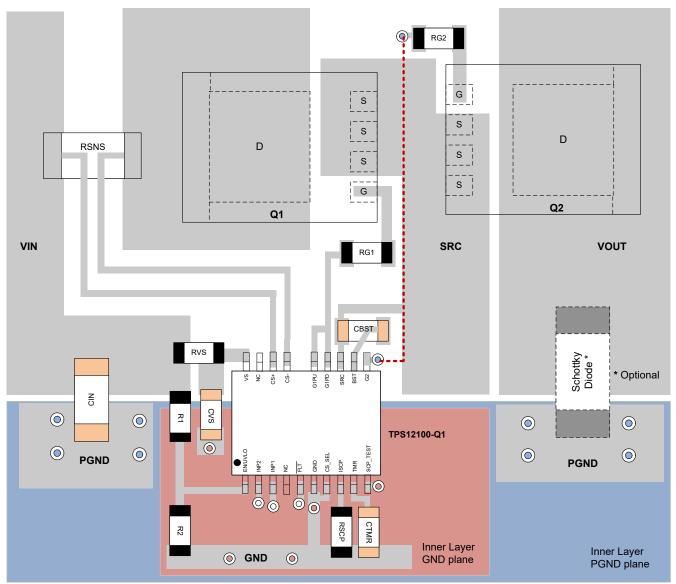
Typical PCB Layout Example for TPS1210-Q1 With B2B MOSFETs
